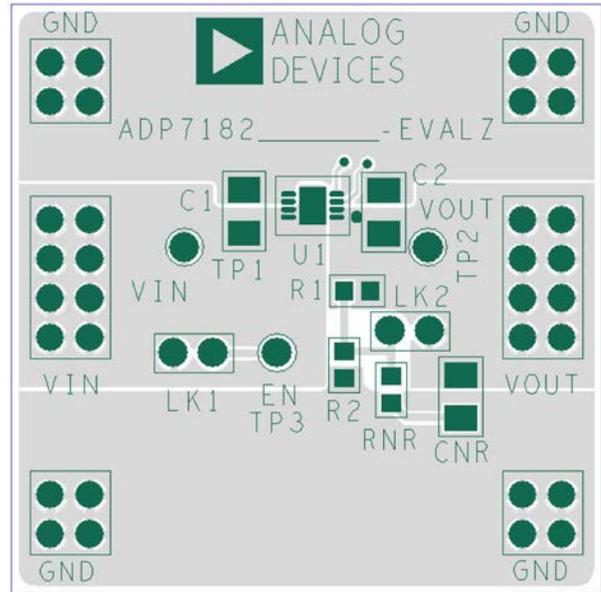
Example of the 8-Lead LFCSP PCB Layout
